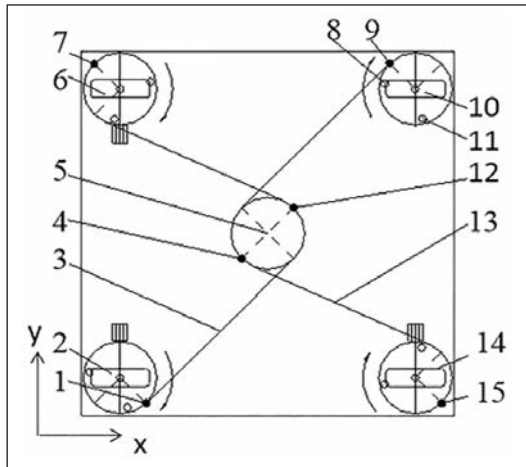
Schematic views of steering gear: 1 – fastener; 2 – wheel; 3 – circular belt; 4 – fastener; 5 – steering wheel; 6 – wheel; 7 – fastener; 8 – location pin; 9 – fastener; 10 – wheel; 11 – location pin; 12 – fastener; 13 – circular belt; 14 – wheel; 15 – fastener
